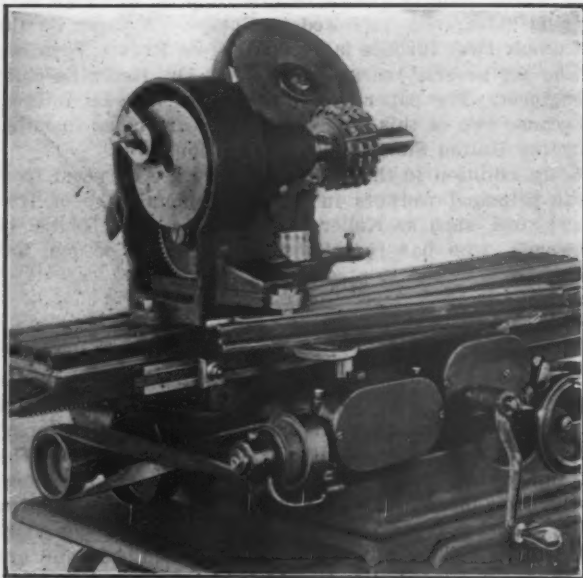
A Formed Cutter Grinding Attachment for the No. 2-K Grinder Built by the Walker Grinder Company, Worcester, Mass.
